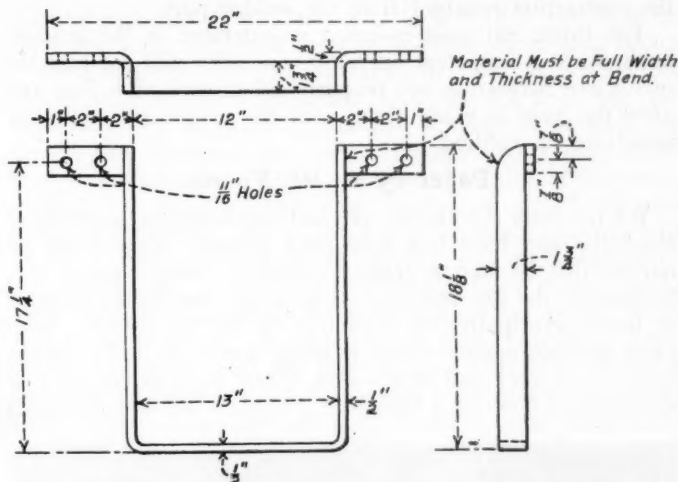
Details of Freight Car Sill Step Made in Former (Fig. 9)
